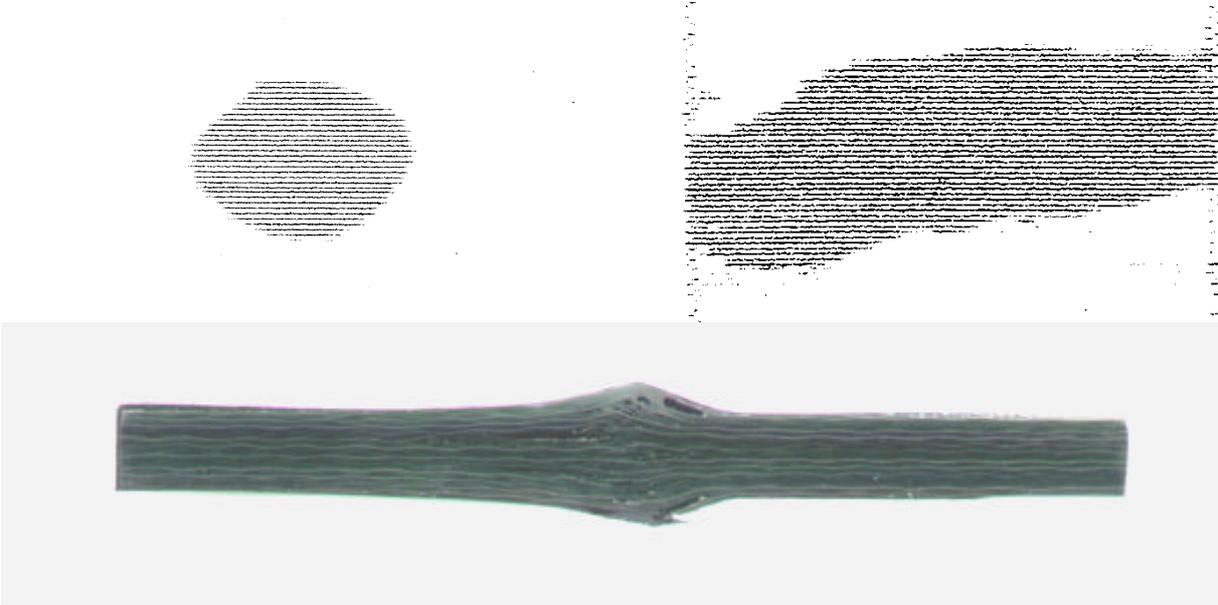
TTU C-scan of a typical coupon before and after test & sectional view of damage site
